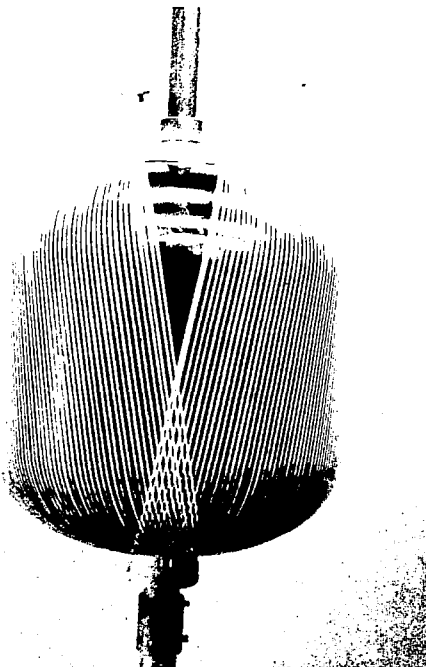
Front View after Mandrel Has Rotated 180 deg
